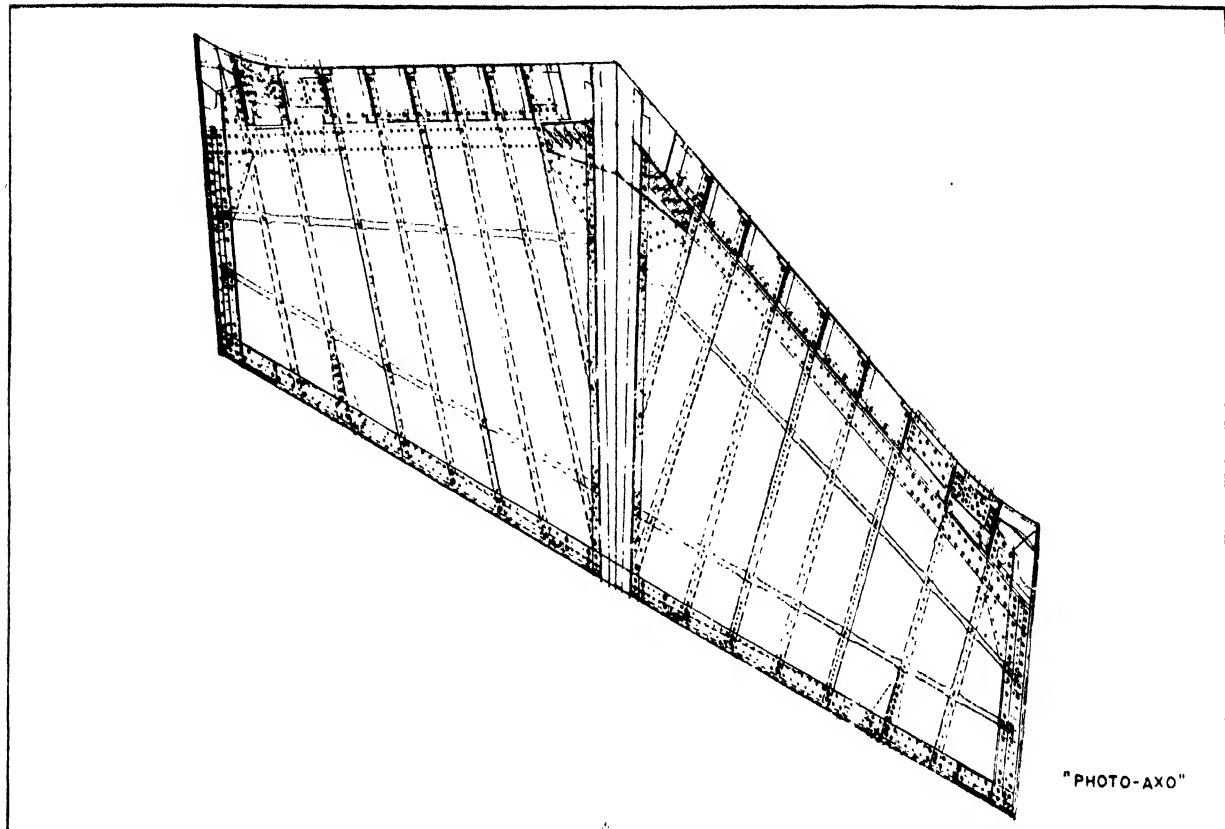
Trimetric photograph of orthographic drawing in Fig. 17. (Glenn L. Martin Company.)
